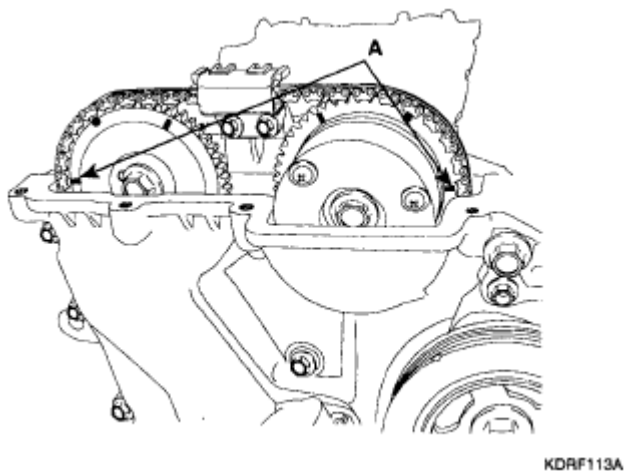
Aligning Mark Of Camshaft Timing Sprockets On Cylinder Head Surface
